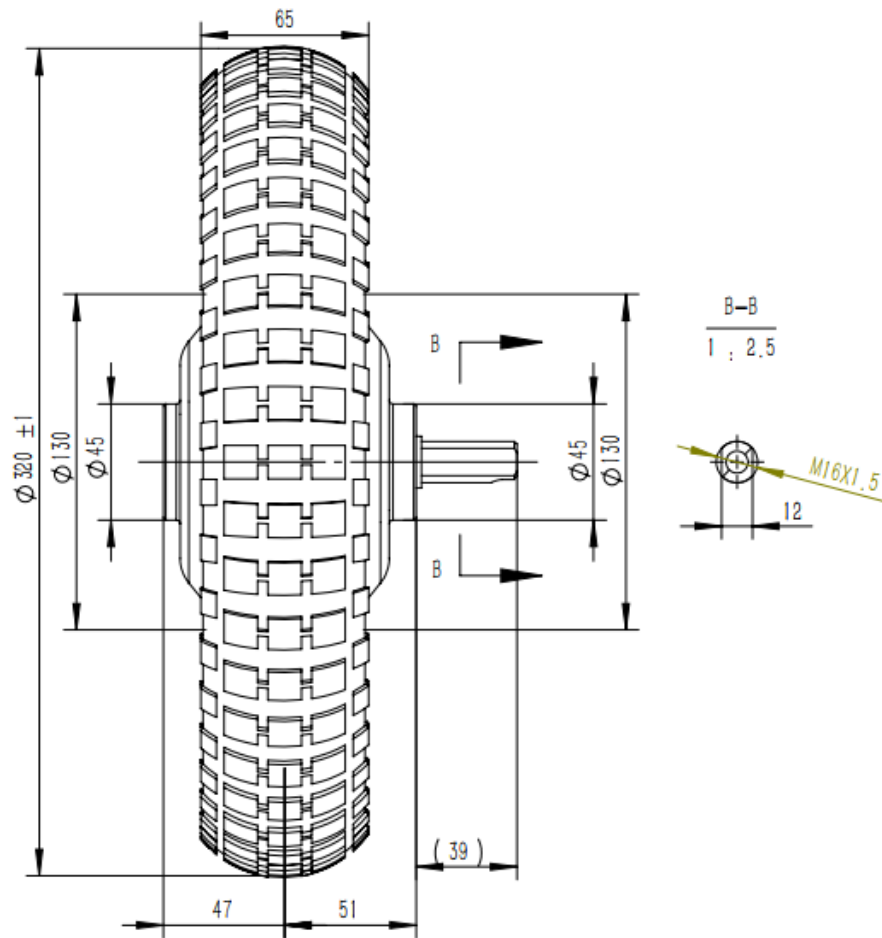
12 inch 13Nm/15Nm pneumatic tire hub motor mounting size
